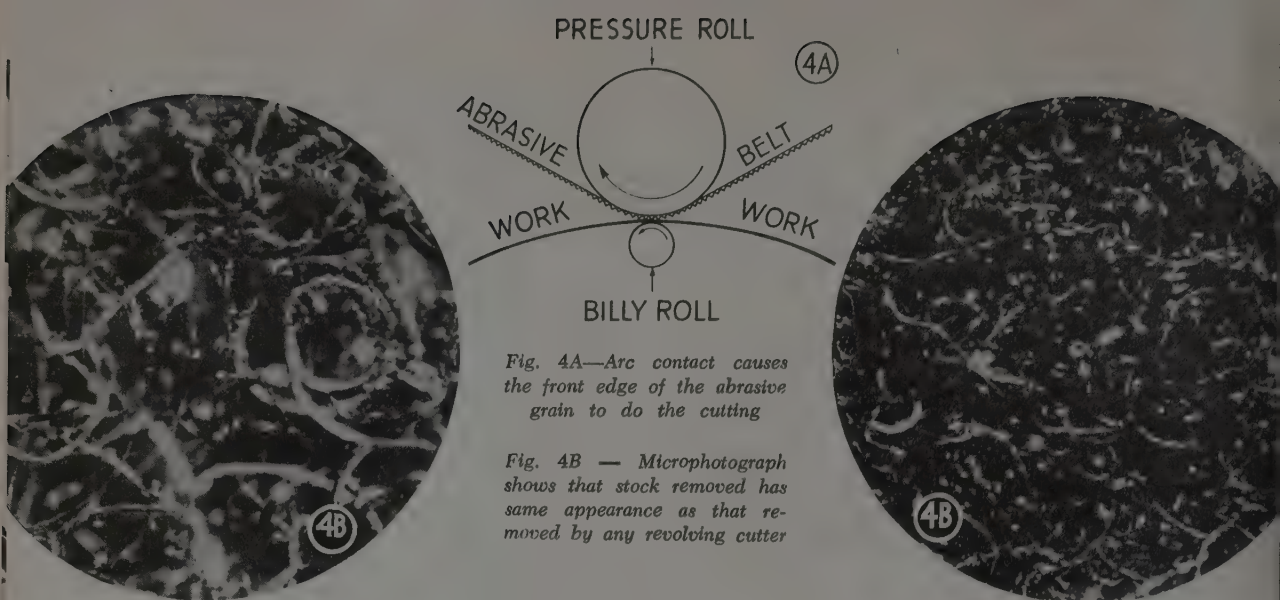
A—Arc contact causes the front edge of the abrasive grain to do the cutting
